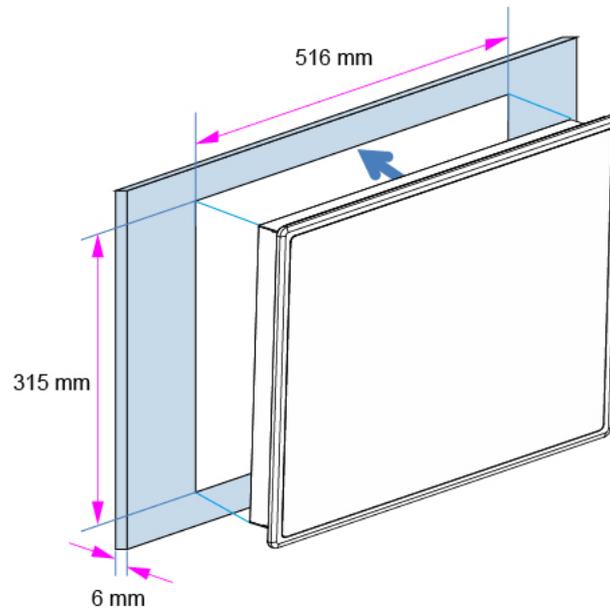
PPC-2150 Series Panel Mount Cut-out hole and maximum panel thickness
